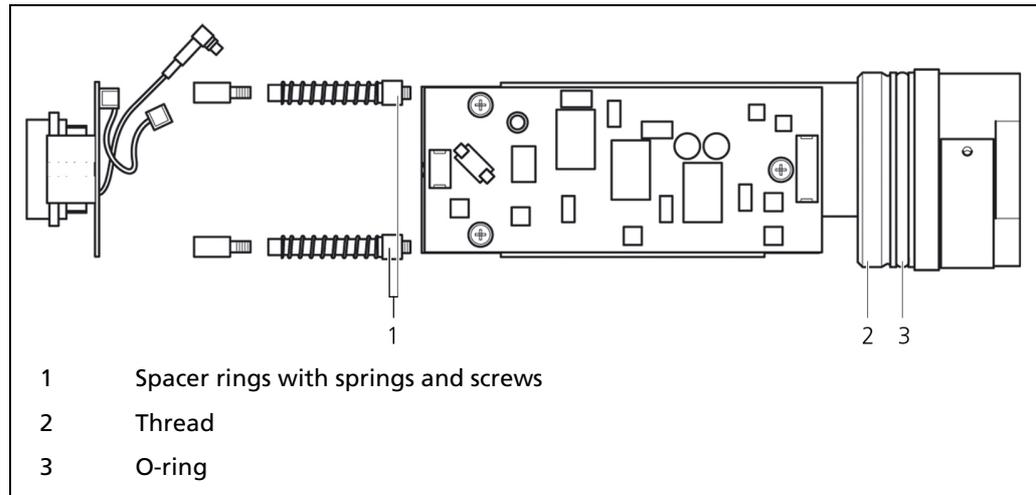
PMT without Mu-metal shielding, spacer rings installed
